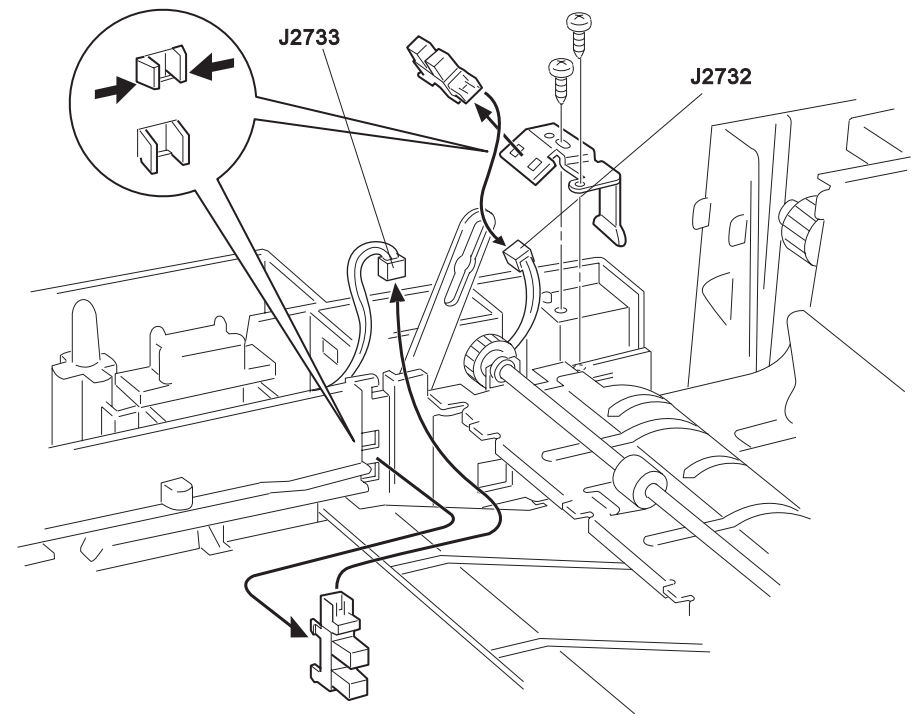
Photo Interrupter (Rear I/L, Chute Cover I/L) Removal
